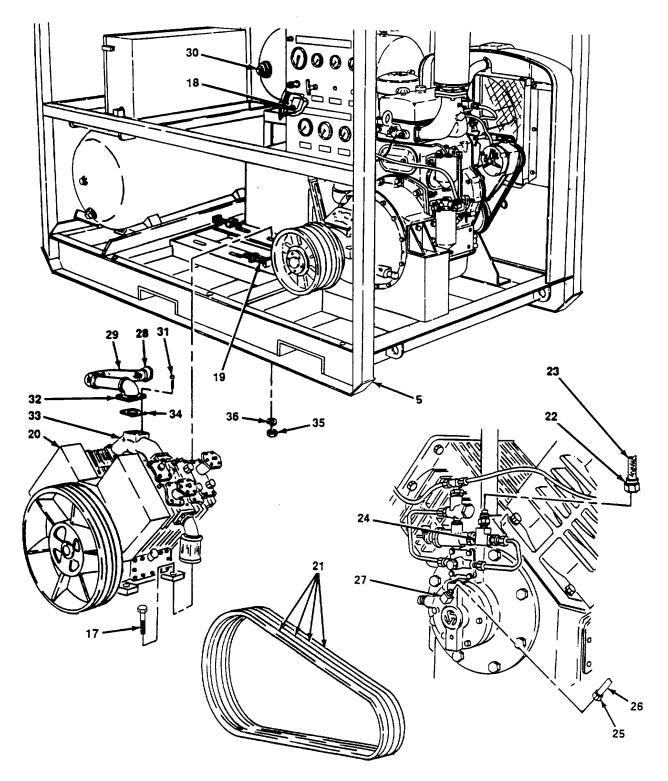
Air Compressor, Removal (Sheet 2 of 2).
